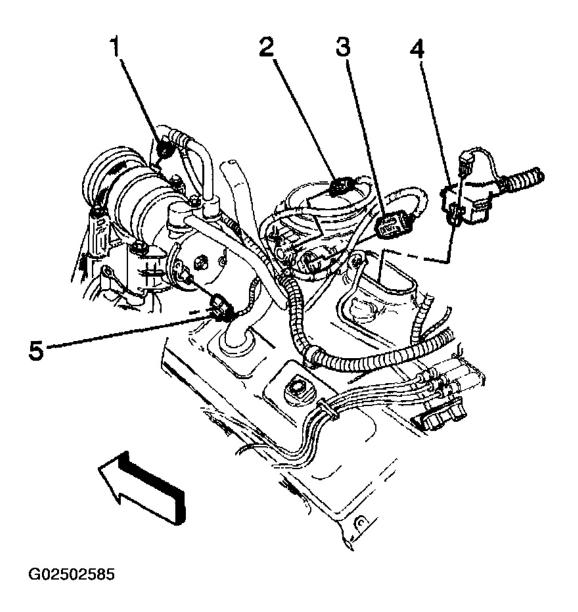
Connecting A/C Compressor Clutch, A/C High Pressure Cutoff Switch, Throttle Position Sensor, Idle Air Control Motor & Fuel Meter Body Assembly Connectors Courtesy of GENERAL MOTORS CORP.
